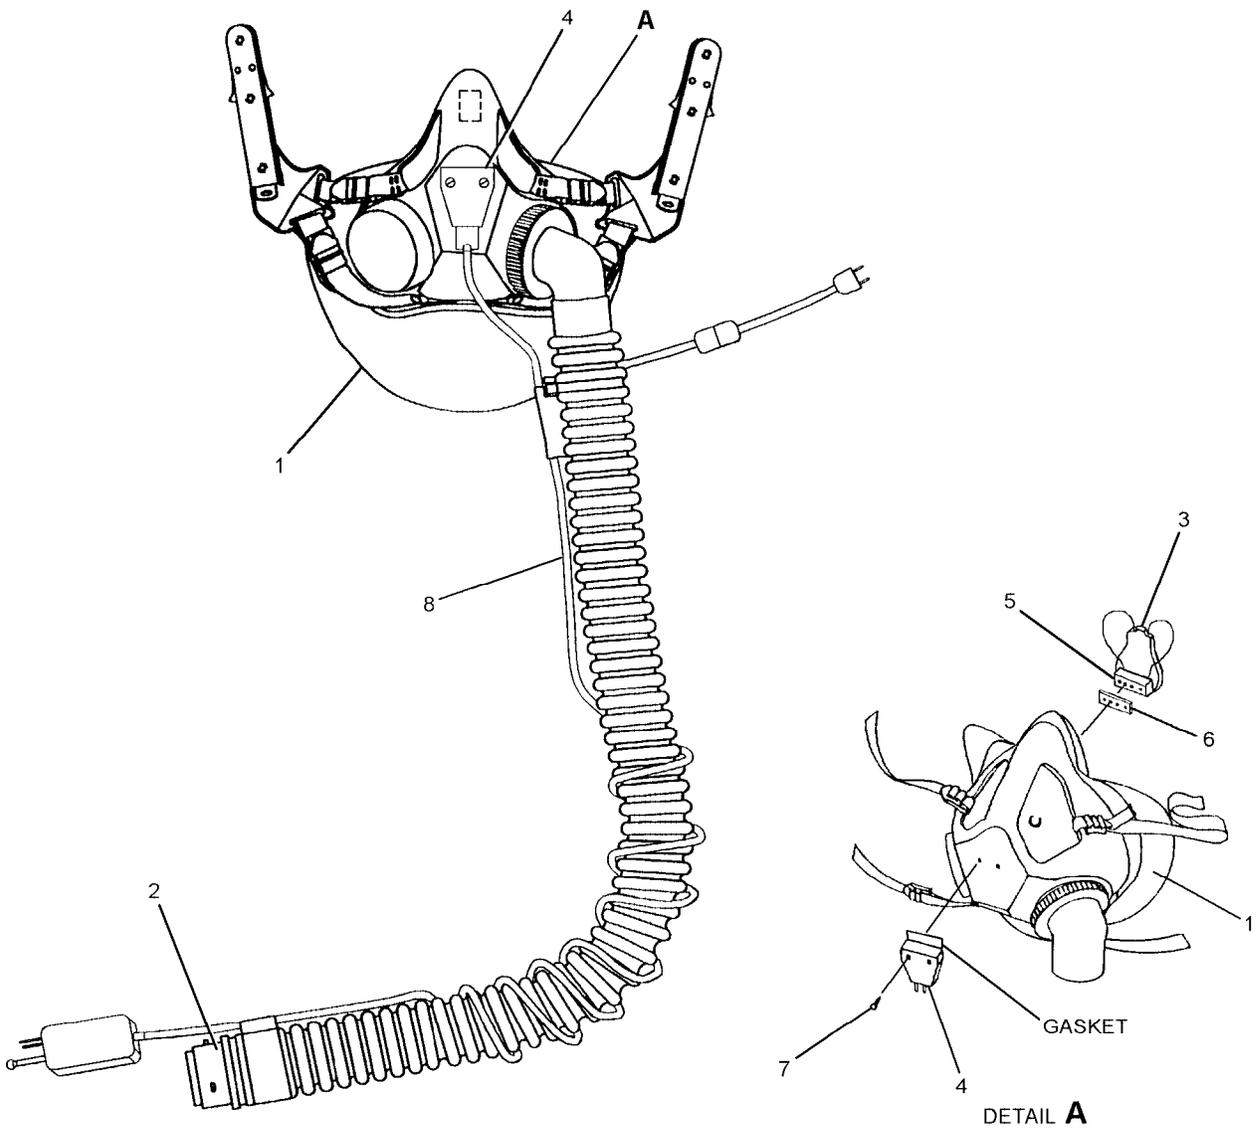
MBU-23(V)2/P Oxygen Mask Assembly Components
